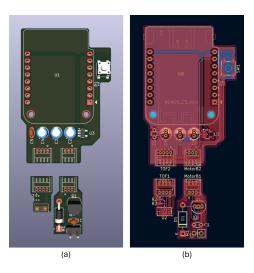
(a) 3D-rendered view of the custom PCB designed for the smart cane system. It shows the placement of components, connectors, and the microcontroller footprint. (b) Top-layer PCB layout showing the routing of signal traces, component labels, and copper pours used in the final board design.
